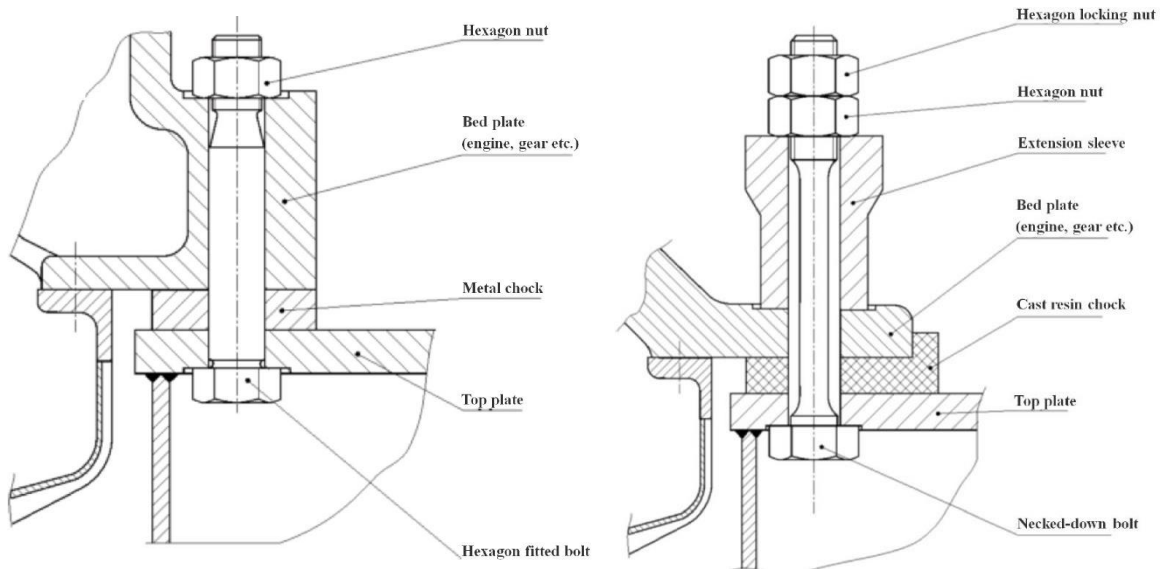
Drawing of metal and resin chock mounting. (GL, 2015)
